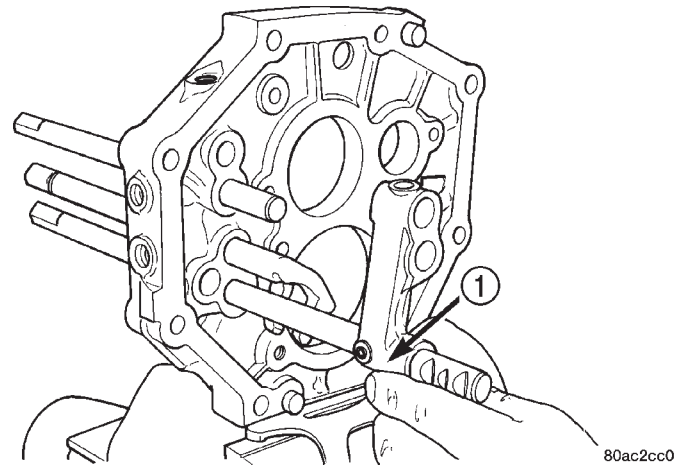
Remove Reverse Shift Head And Rail Assembly
